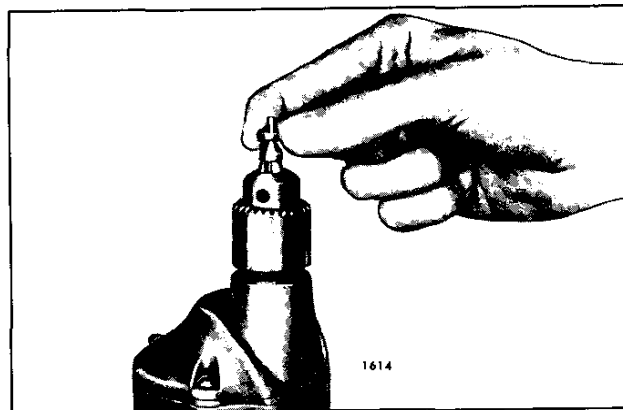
Lapping Edge of Hole in Valve Seat Using Tool J 7174
